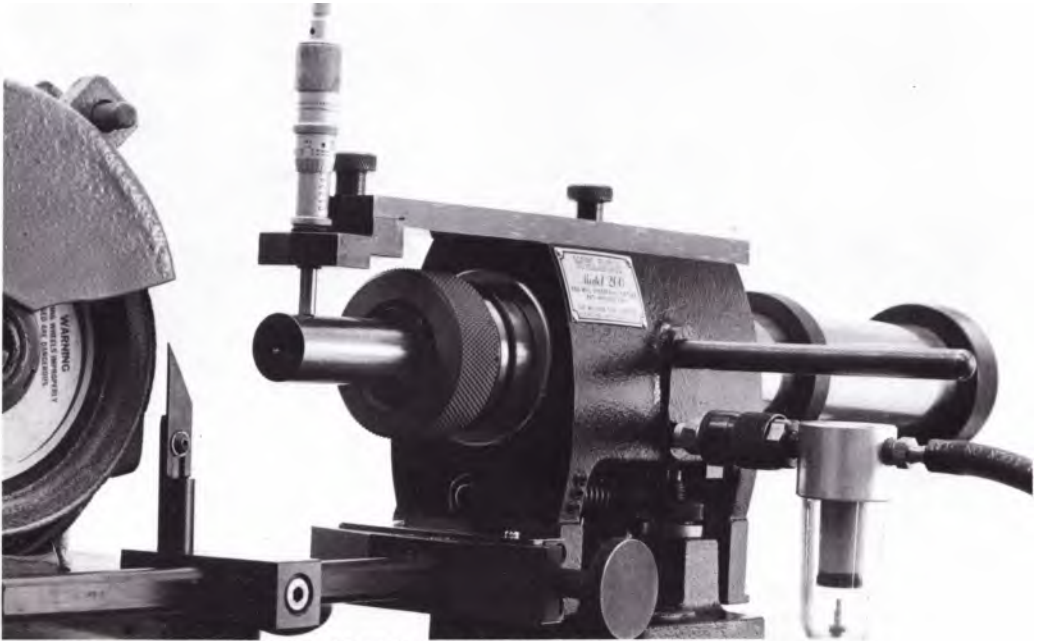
Micrometer and Cylindrical Test Gage in Position for Initial Setting.
